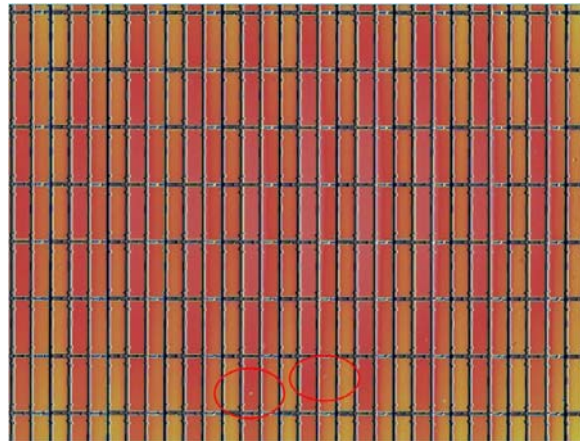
3D measurement for defect analysis inspection. Area: 3.4 x 2.5 mm². Note the two red encircled details. The left is a MURA defect consisting of a hole, while the right is a deposited particle.
